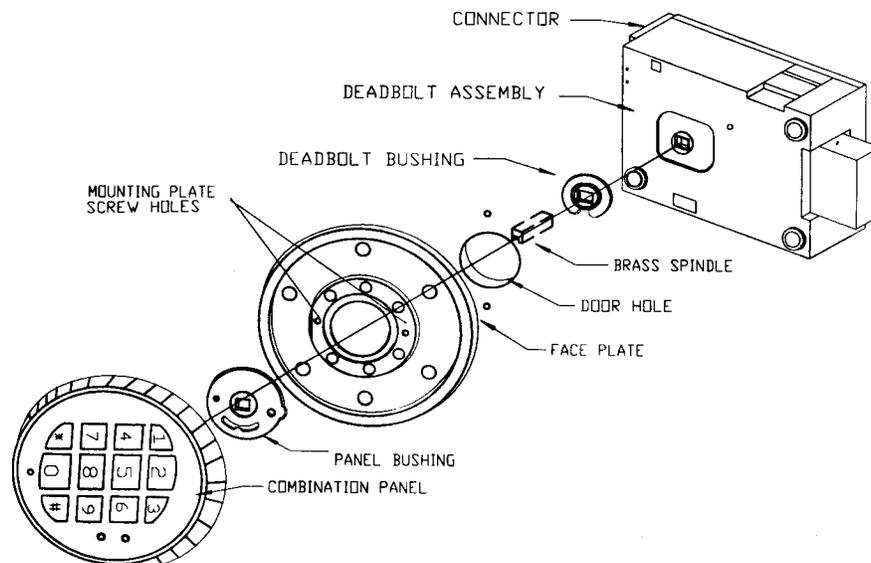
HORIZONTALLY MOUNTED LOCK
